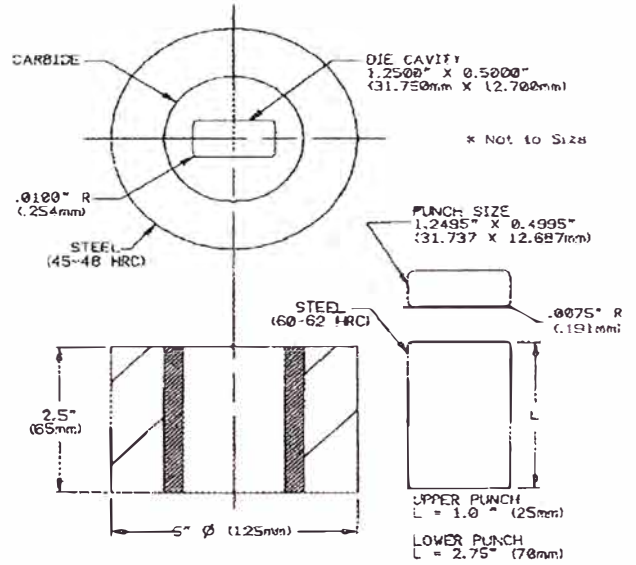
Example of Tooling to Produce a Rectangular Test Specimen.
